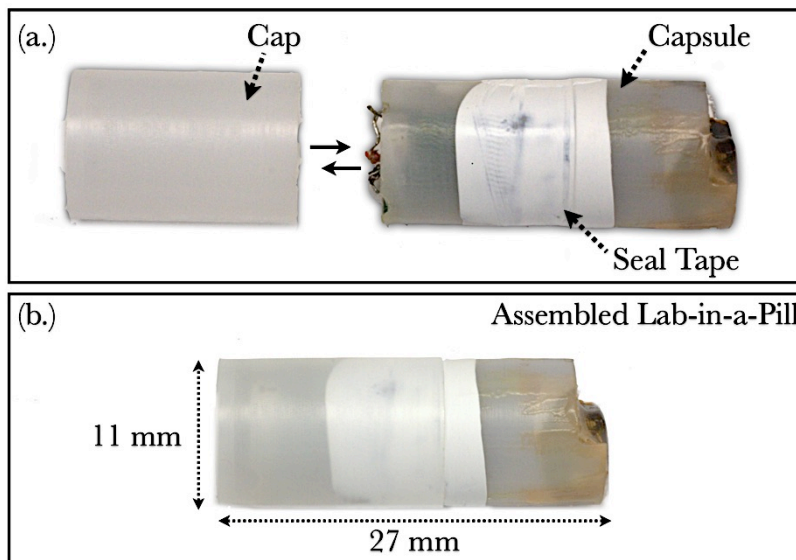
Final device assembly. (a.) PCB inserted into capsule and sealed with epoxy. Teflon seal tape is then wrapped at the end-cap connection point. (b.) End cap and capsule joined together.
